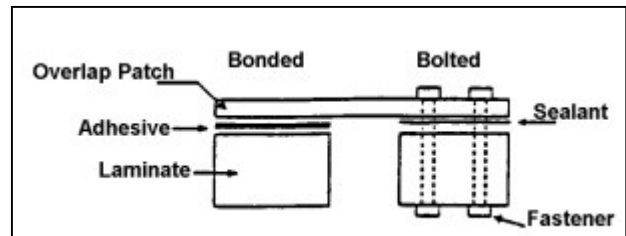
Cross section of bonded and bolted overlap repairs.
